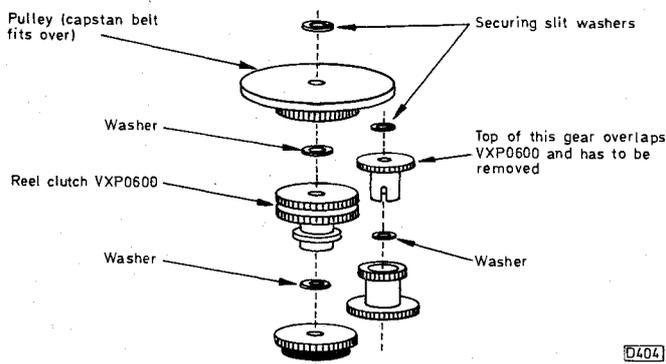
The reel drive arrangement, viewed from the rear with the machine upside down.
